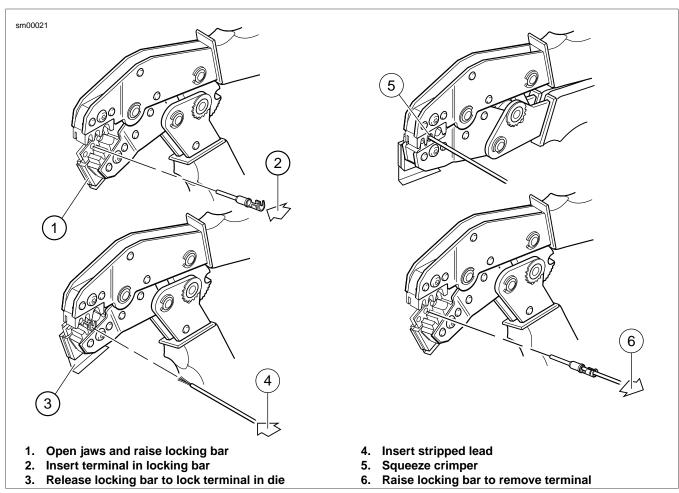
Crimping a Deutsch DT Sealed Terminal
